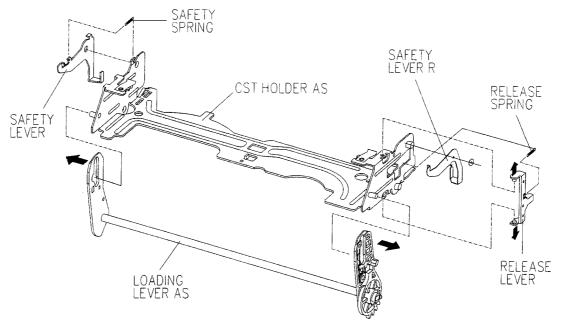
DISASSEMBLY OF THE CASSETTE HOLDER ASS'Y
